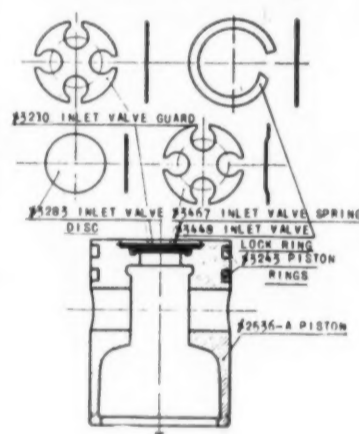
Zerozone piston assembly, showing detail of inlet valve parts.
